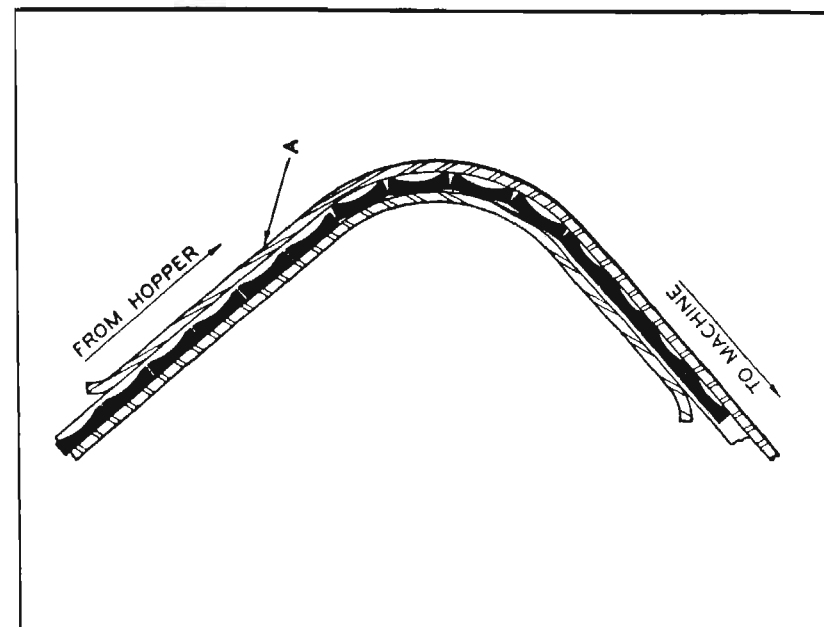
Another Track Arrangement for Reversing Position of Parts Received from Hopper.
